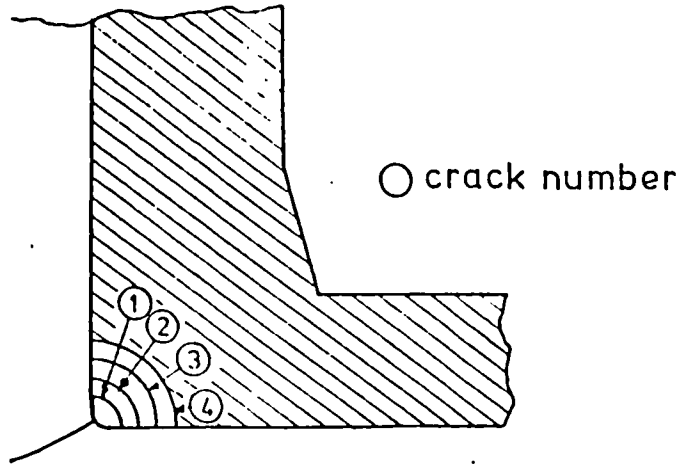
Corner crack configurations 1, 2, 3 and 4
